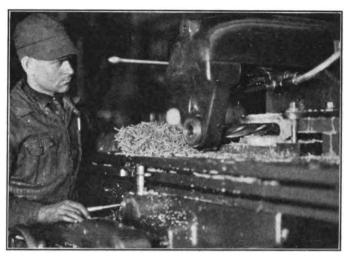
Side Rod Fork Ends Are Cut Out on a Vertical Knee-Type Milling Machine
